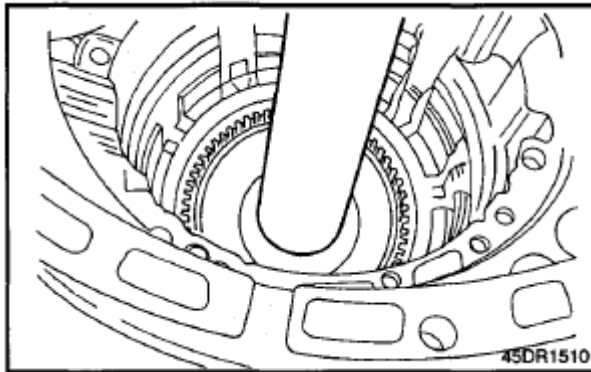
Inserting Assembly Of Annulus Gear Into Transfer Drive Gear
